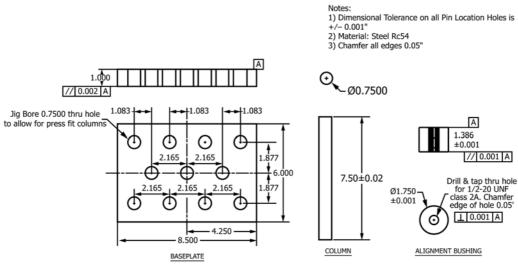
Drawing of Alignment and Bonding Fixture (inch-pound units)
